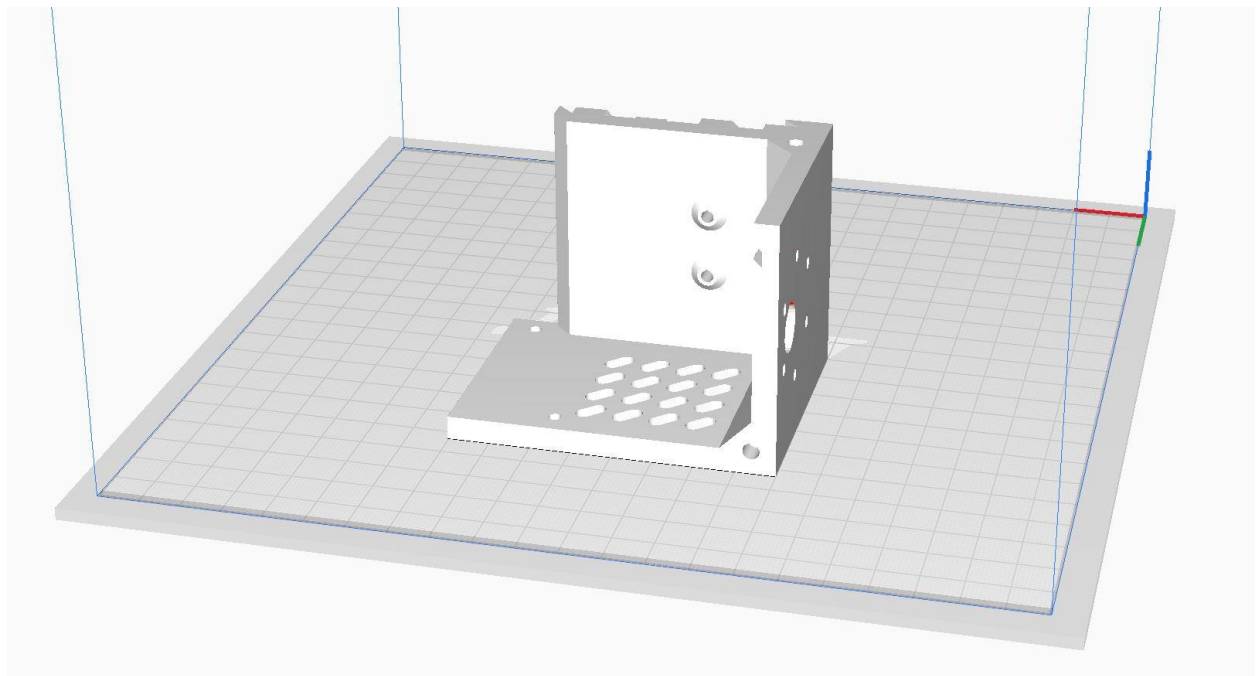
Print orientation for the motor mount attachment piece, illustrating that ventilation slots print on the bottom face.
